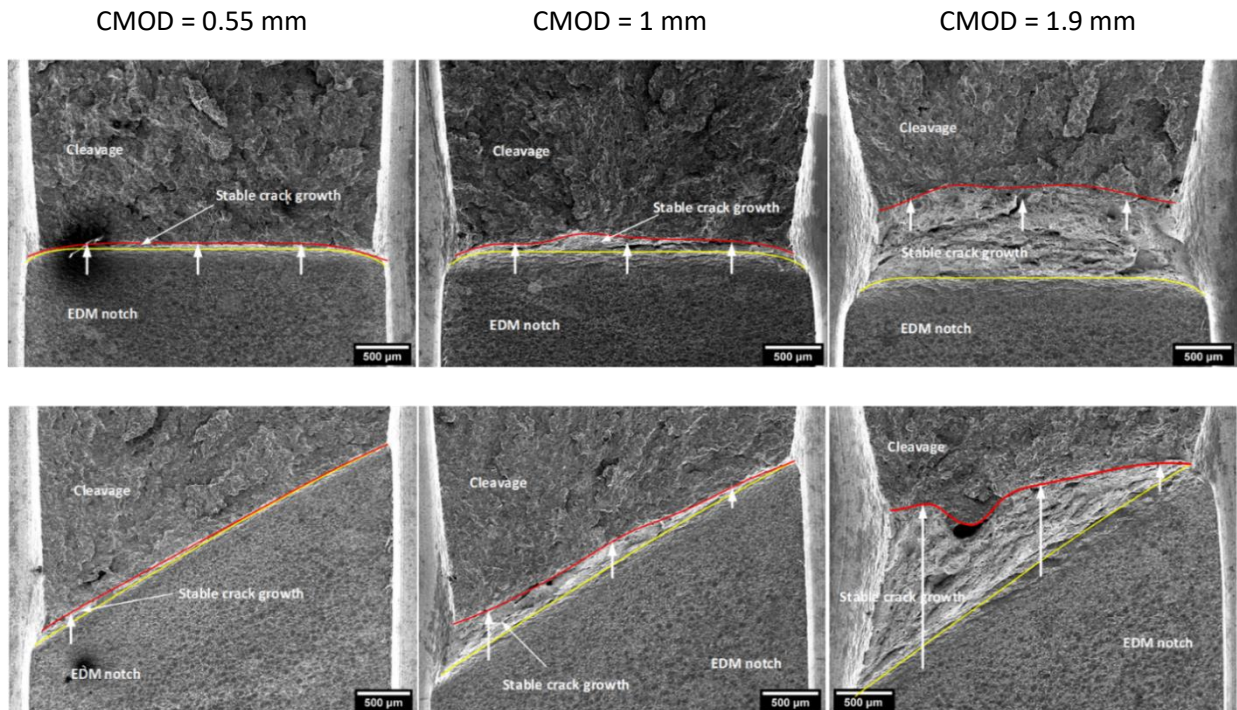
The fracture surface of the propagated uniform initial crack and the tilted initial crack at three CMOD levels
